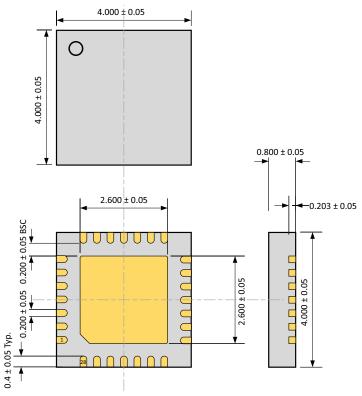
QFN 28-pin 4x4mm drawing (all dimension in mm)
